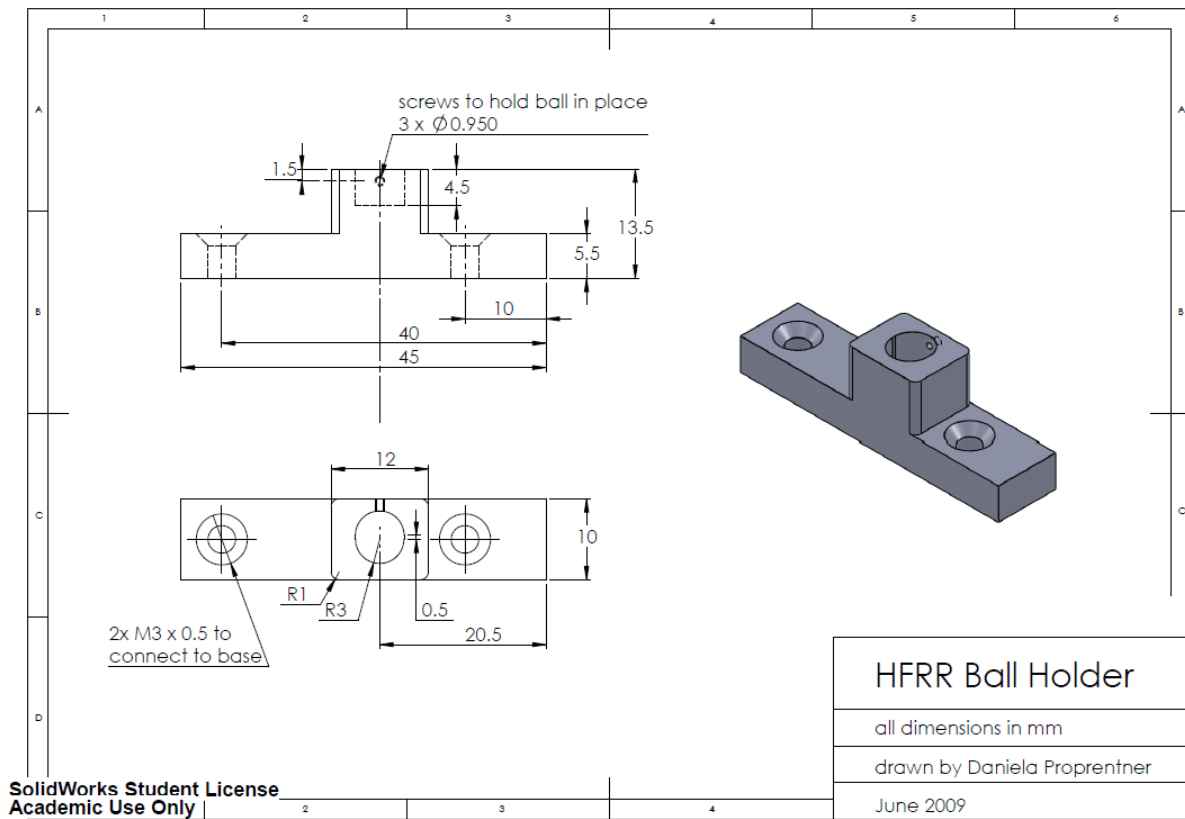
Newly designed lower HFRR sample holder for a steel ball.
